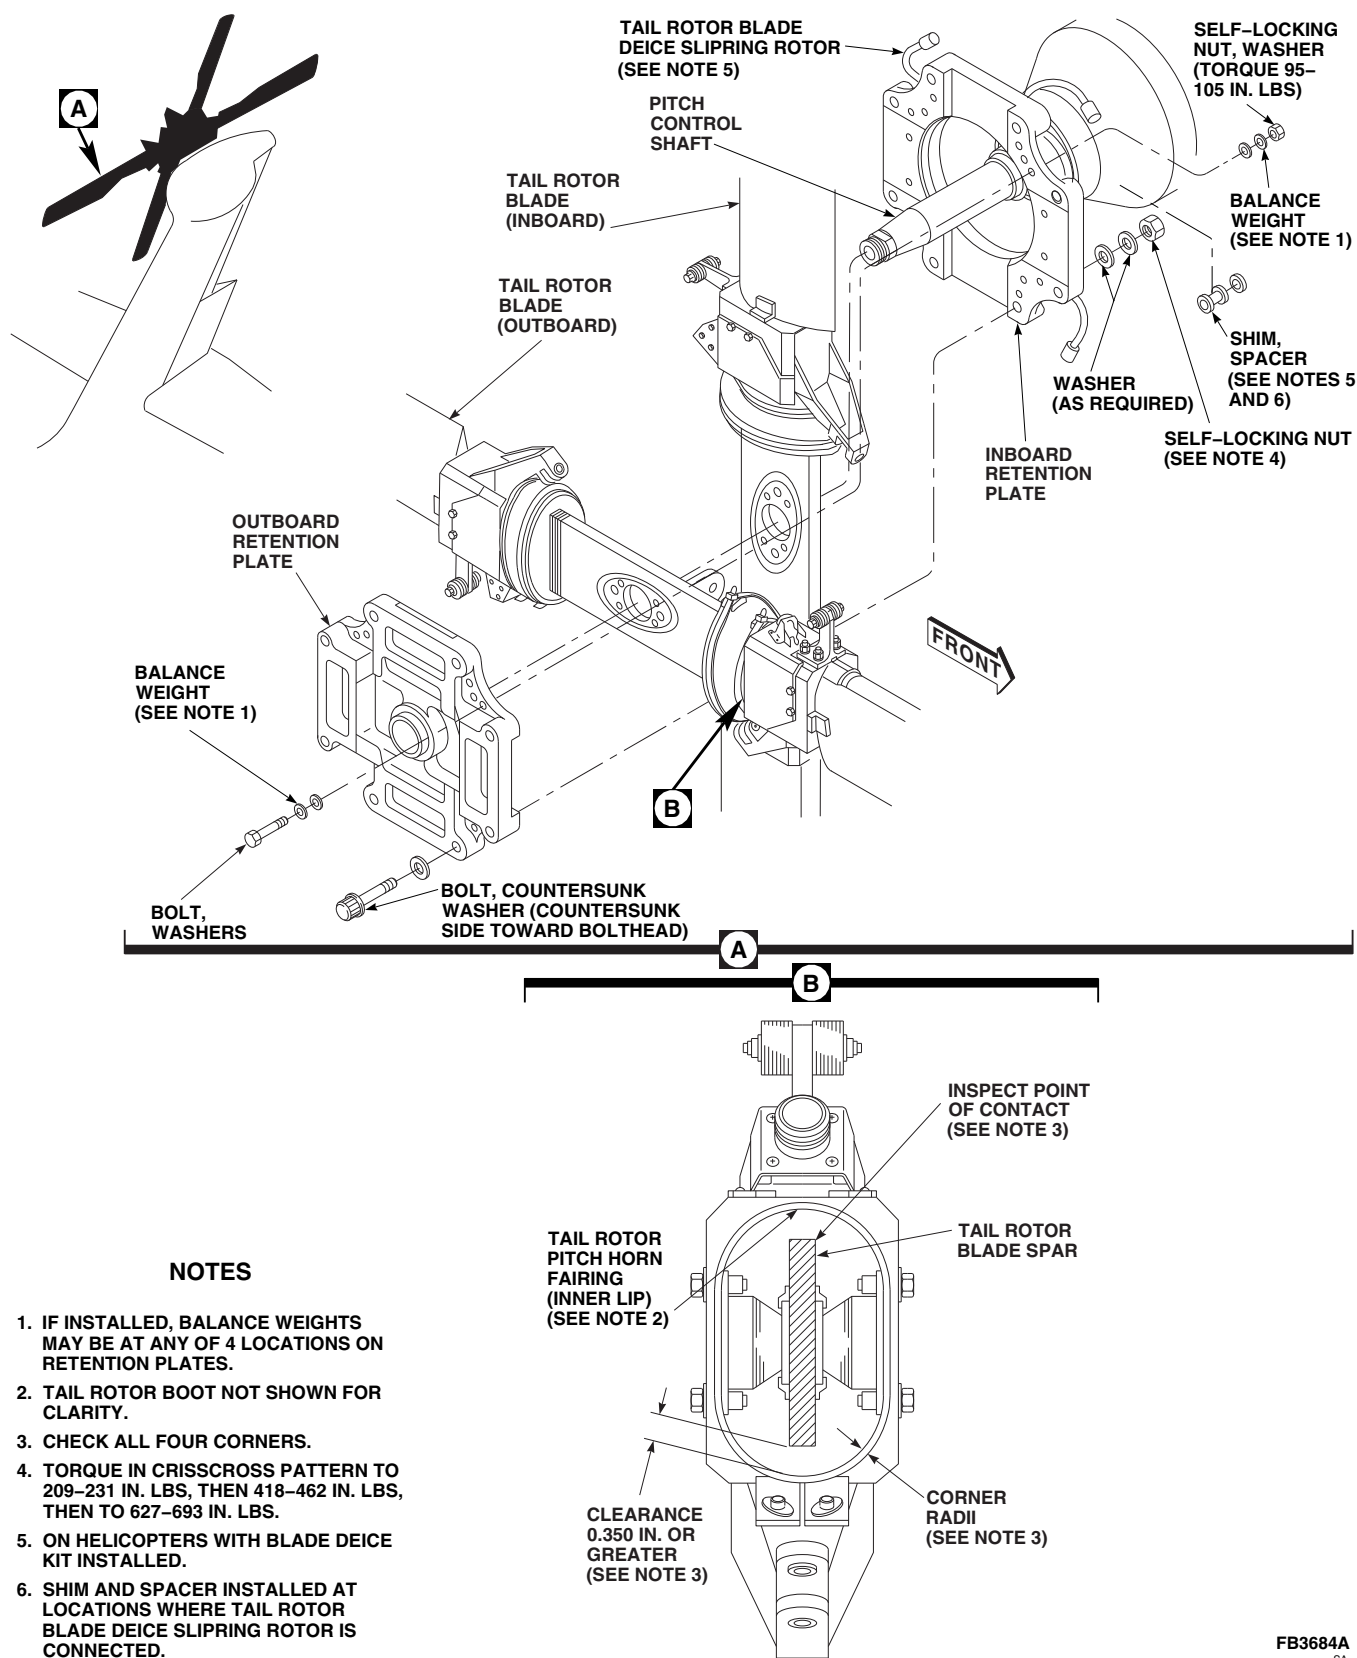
REPLACE TAIL ROTOR BLADES
